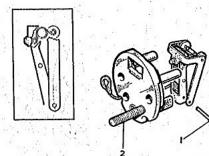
Fitting the rocker assembly to the pedestal. (Inset) the correct position of the centre toggle spring
